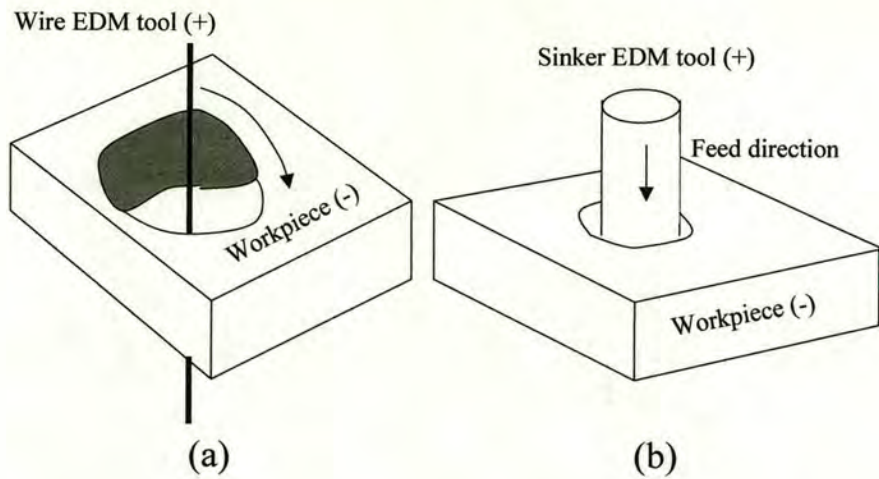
Illustration of wire (a) and sinker (b) EDM.
